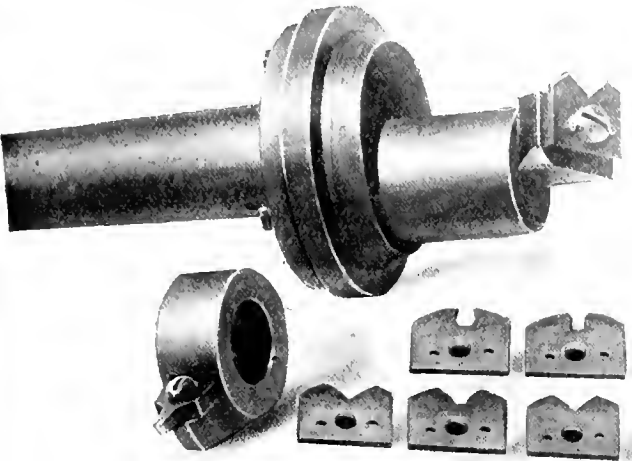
Chuck, Fly-cutter, and Pieces milled in Experiments Described
